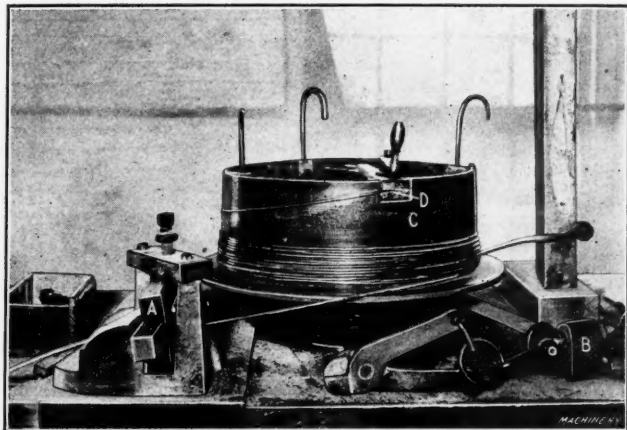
A Typical Wire Drawing Machine for Heavy Wire
